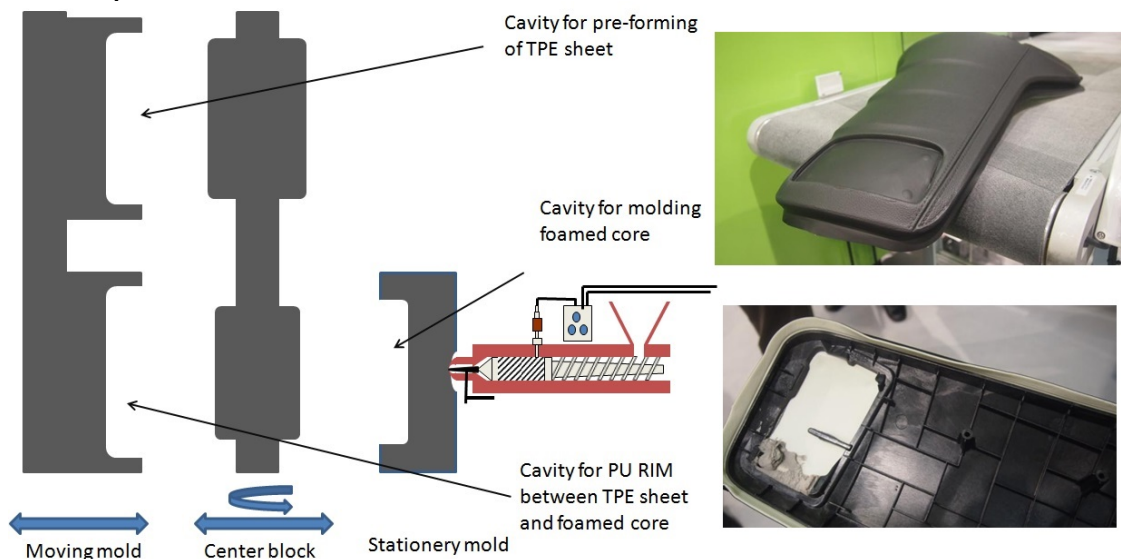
Schematic draw of the mold demonstrated at ENGEL to produce soft touch part (Left) and the pictures of the part (Right).
